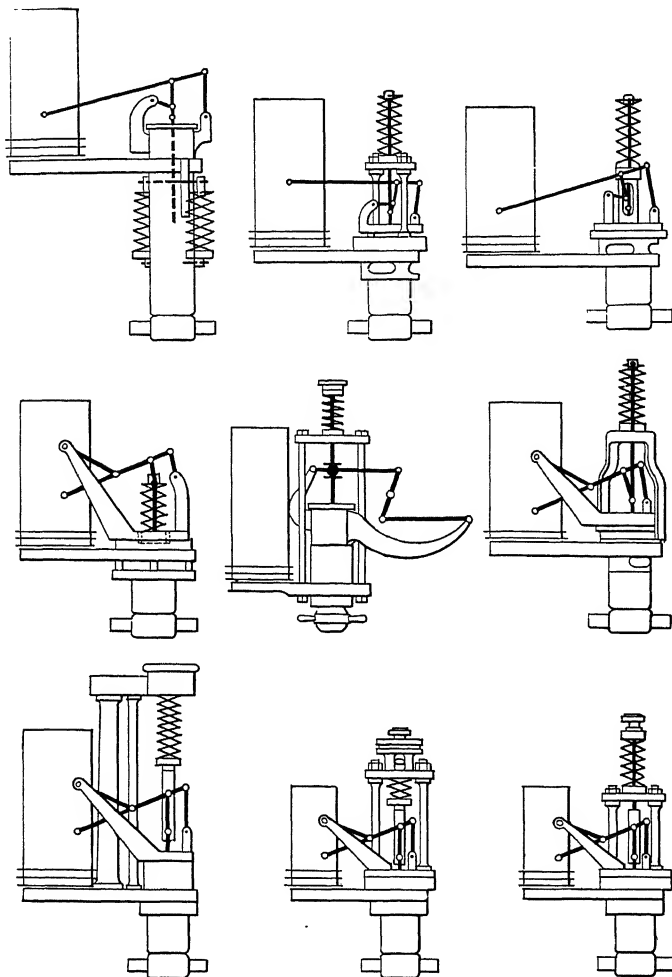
VARIOUS TYPES OF EXTERNAL SPRING INDICATORS.
